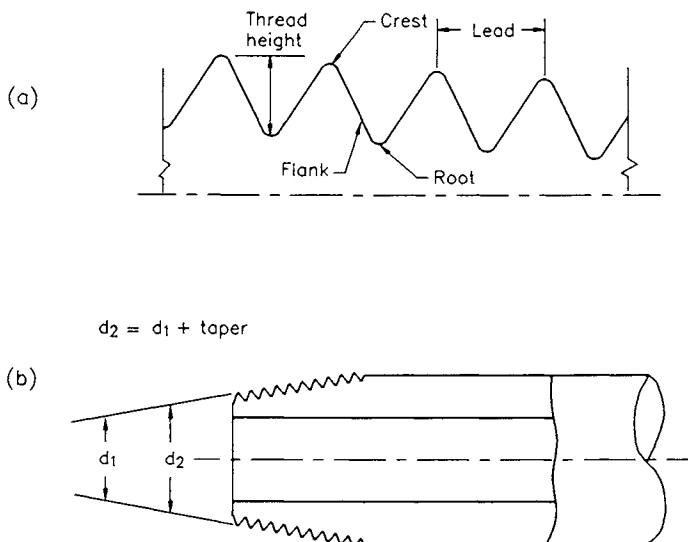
Basic elements of a thread. The thread taper is the change in diameter per unit distance moved along the thread axis. Thus, the change in diameter, $d_2 - d_1$, per unit distance moved along the thread axis, is equal to the taper per unit on diameter. Refer to Figs. 9 and 10 for further clarification.
